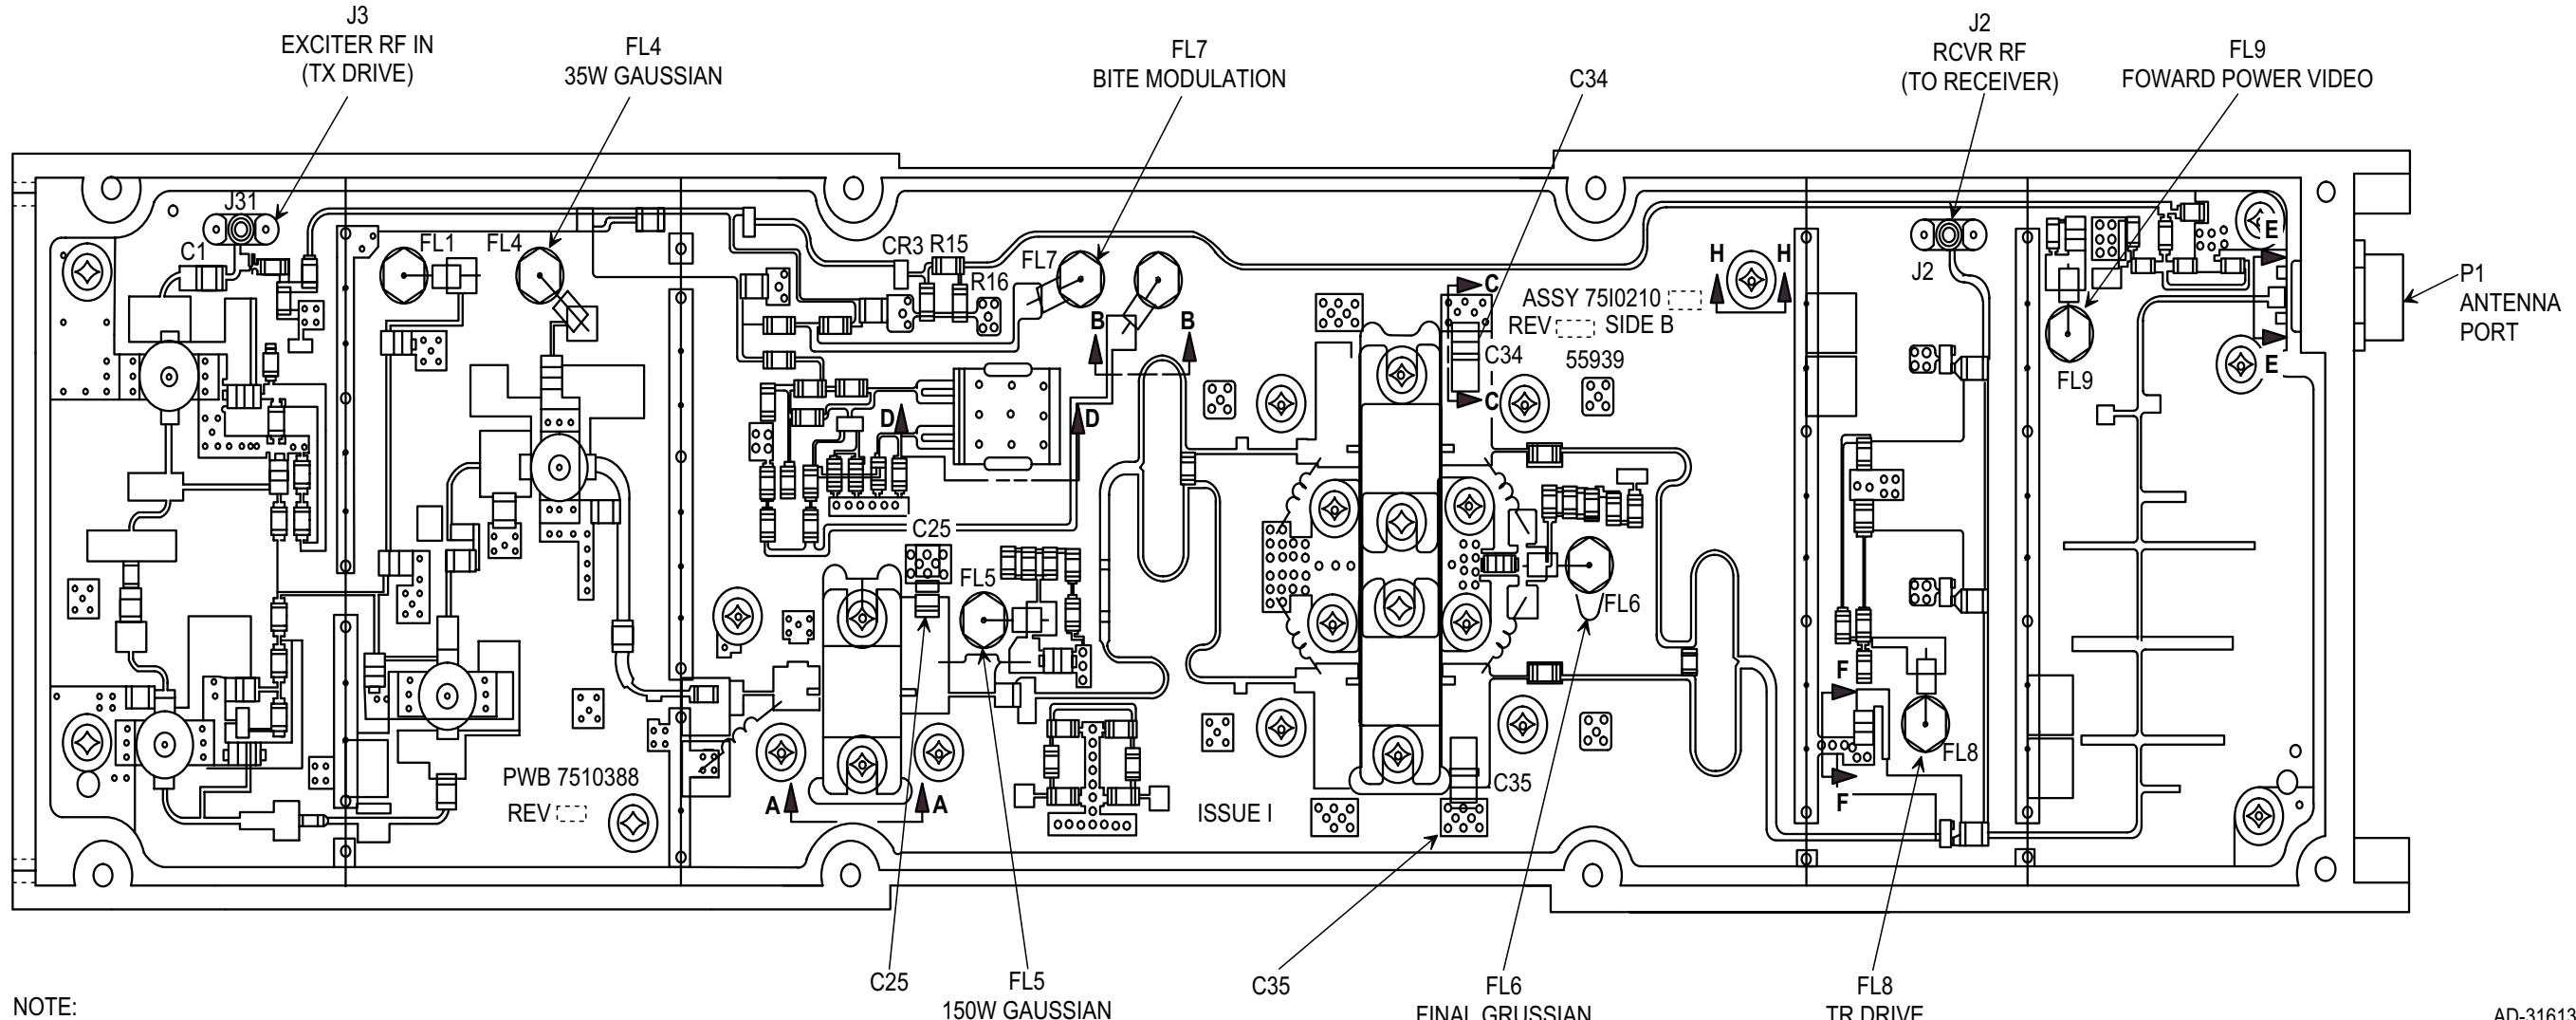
Transmitter CCA A3 Test Points and Adjustable Component Locations (Sheet 2)
